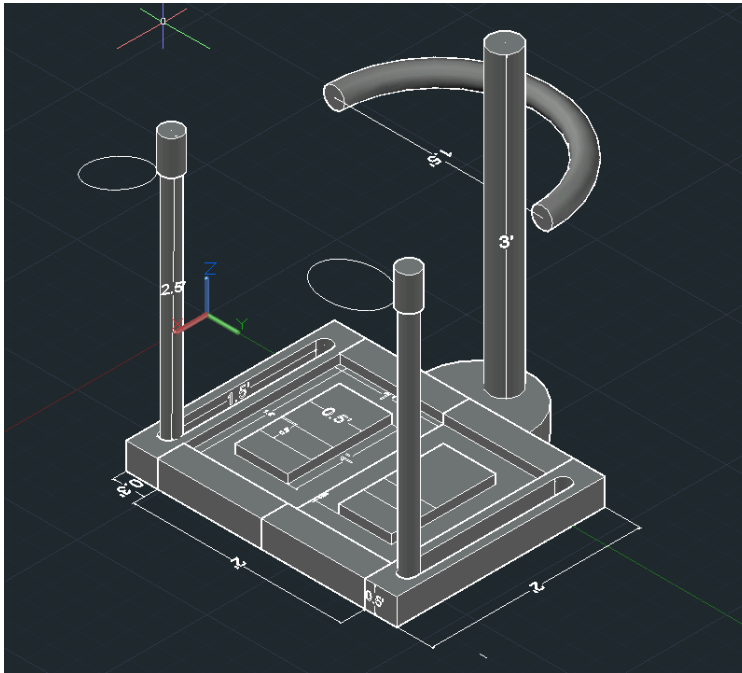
An 3-dimensional AutoCAD drawing of our hypothetical design with additional components with appropriate dimensions in ft.
